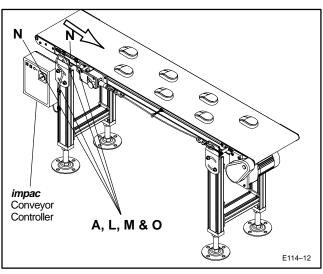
Pull Cord E-Stop Cable Routing to impac Conveyor Controller
